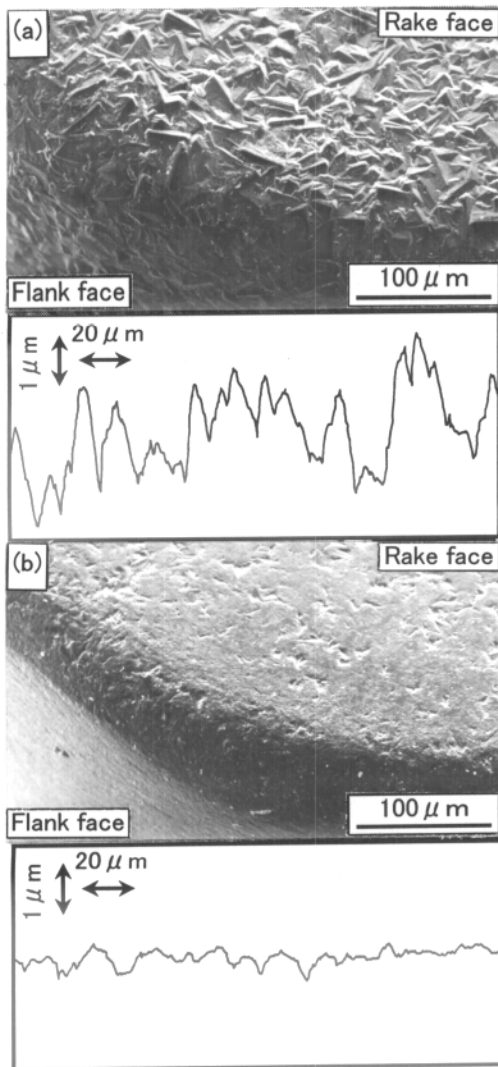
SEM micrographs of cutting edges and surface profile of the diamond coated tool comparison between before and after polishing; (a)the SC100-L tool and (b)the SC100-LP tool
